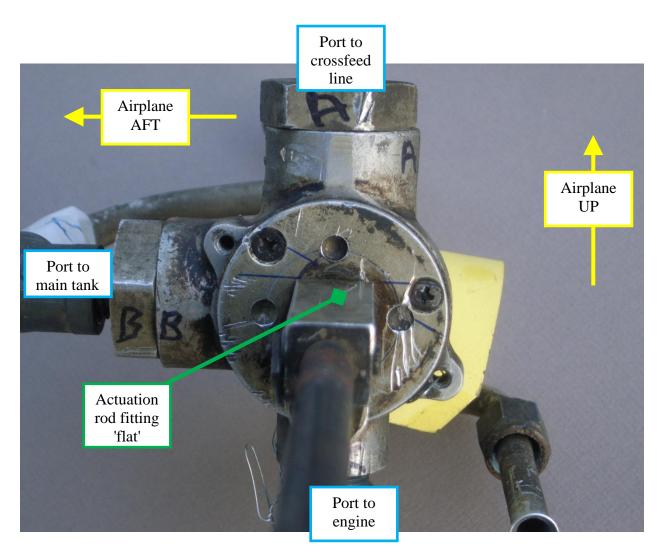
Valve with Actuation Rod Fitting 'Flat' Oriented Up (View looking left/outboard)
